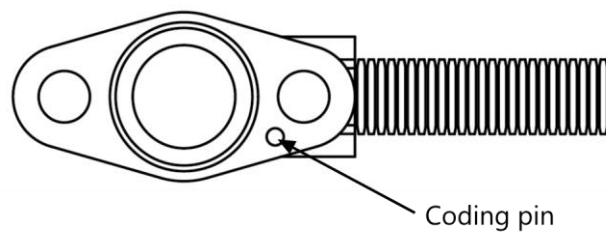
/8: Cable outlet bent, parallel to centre line of the mounting drill hole of the flange (example)
